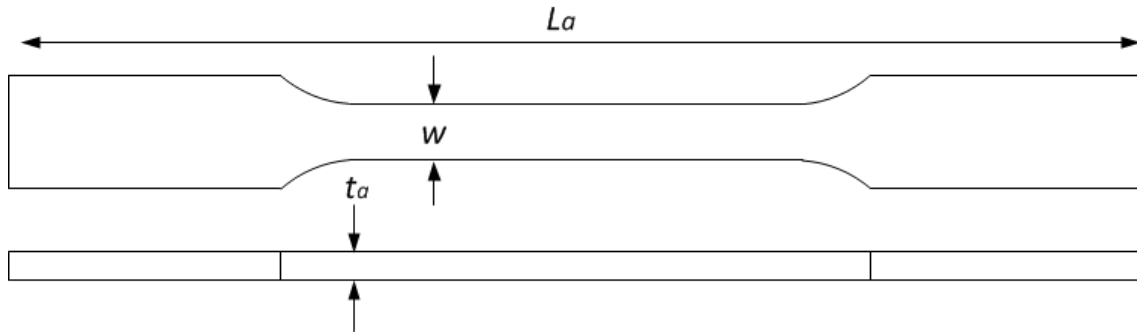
Specimen geometry for the tensile test in accordance to standard.
